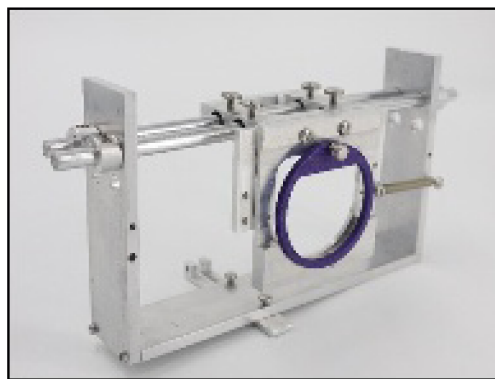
Photo of the machined and fully assembled mechanical frame. A purple 3-D printed model of an SRF frame is placed for reference.
